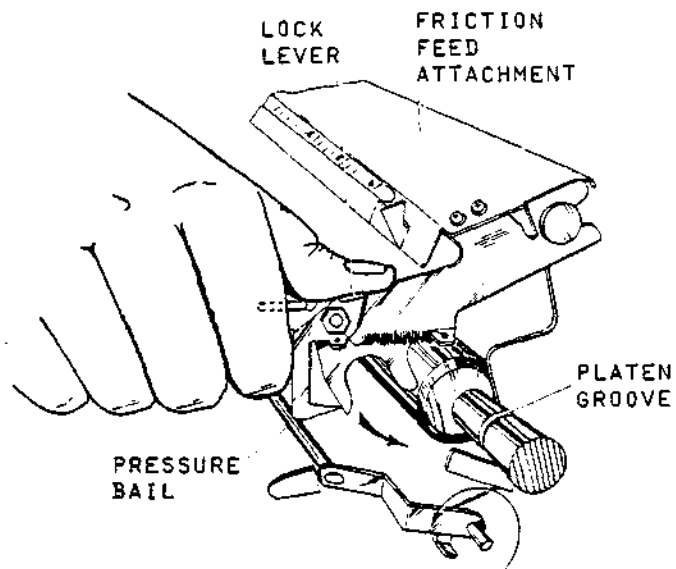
Friction-Feed Attachment Removal (Right Side Only)
